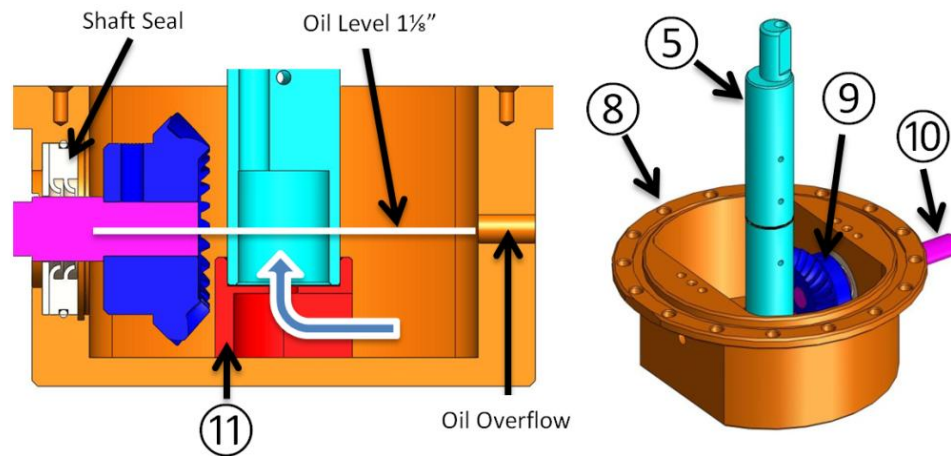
Bottom cover assembly with horizontal miter gear, artificial sump, power takeoff shaft, and main shaft. It also shows the oil height in the bottom cover as well as oil flow into the shafts oil pump.
